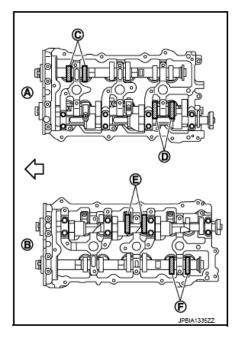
Identifying Valve Clearances Measuring Areas Of No. 5 Cylinder Courtesy of NISSAN MOTOR CO., U.S.A.
